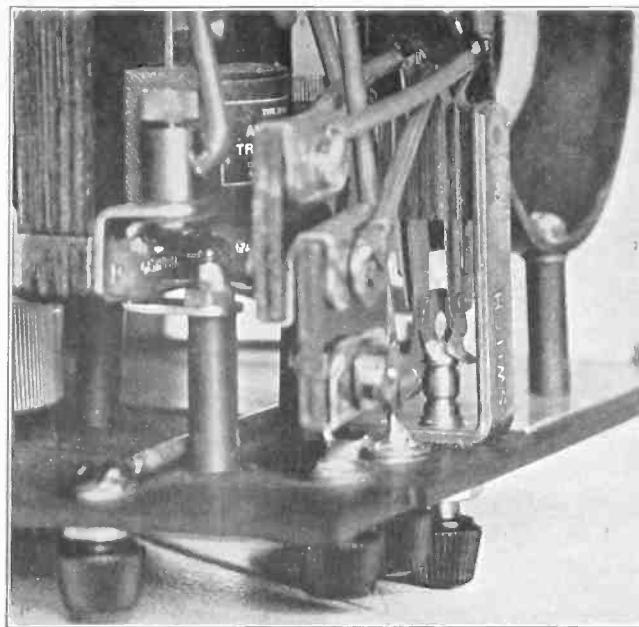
Close-up of the push-pull switch. The plug part is made from a short length of $\frac{1}{4}$ -inch brass rod with insulated knob taken from a rubber-headed binding post. The brass washer prevents the plug from being pulled out of the panel altogether, as it is soldered to the end of the rod. The position of the push-pull switch determines the wavelength band covered by the tuner. For higher wavelengths the switch is pushed in. The jack makes an efficient switch on account of its contact points being silver.
